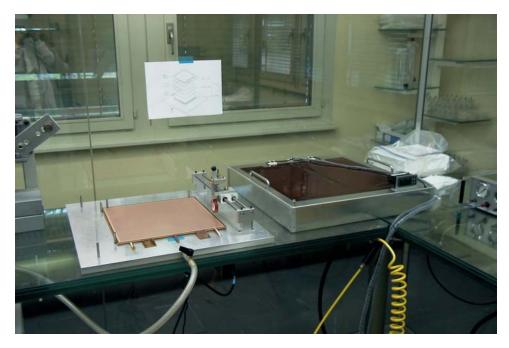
Mounting template and gluing wheel used for the construction of GEM detectors.
